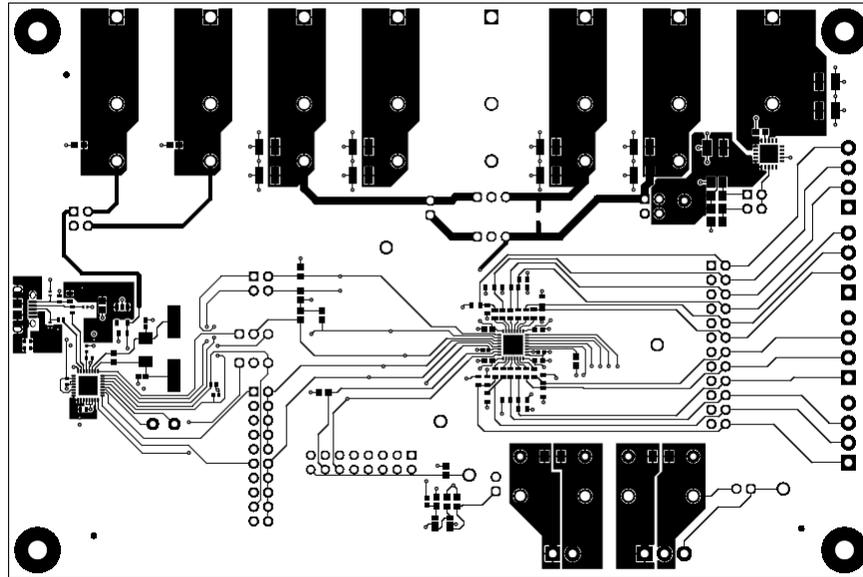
AFE20408EVM PCB Top Layer Layout
